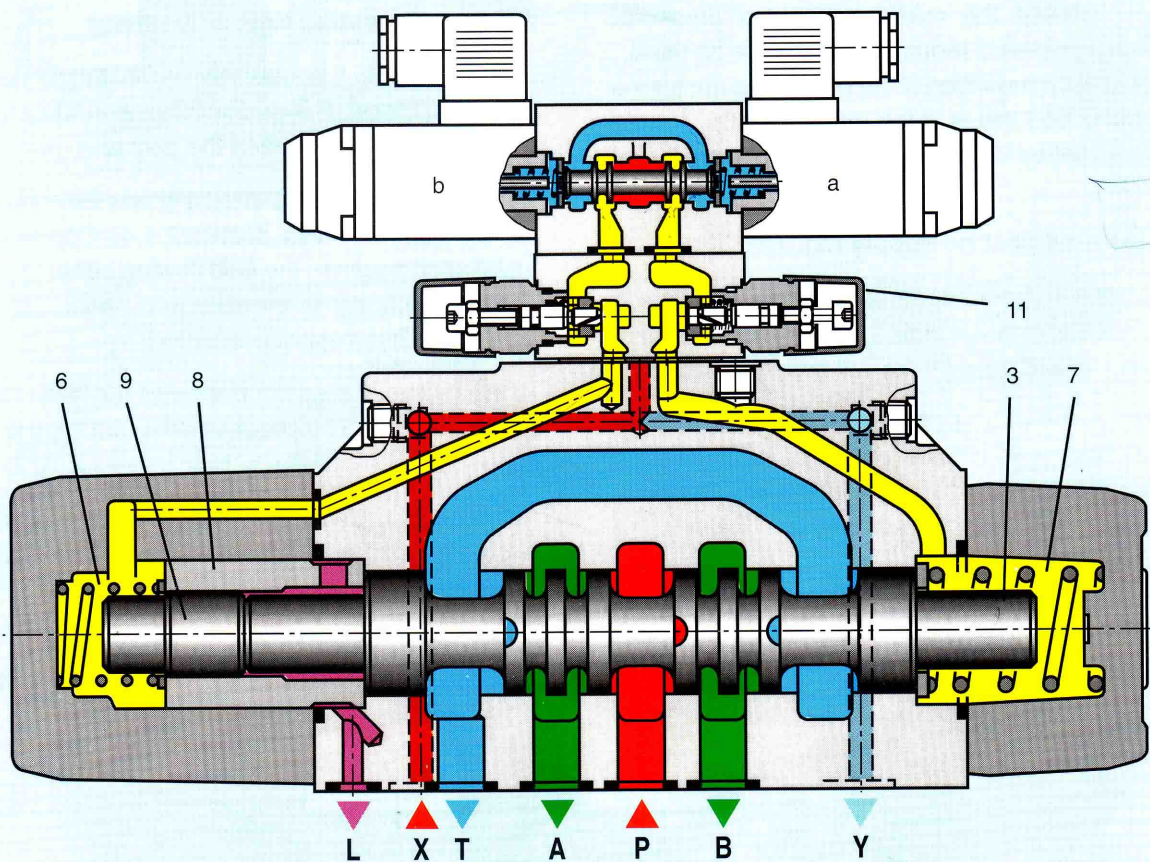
Electro-hydraulically operated directional spool valve, pressure centred, for sandwich plate
